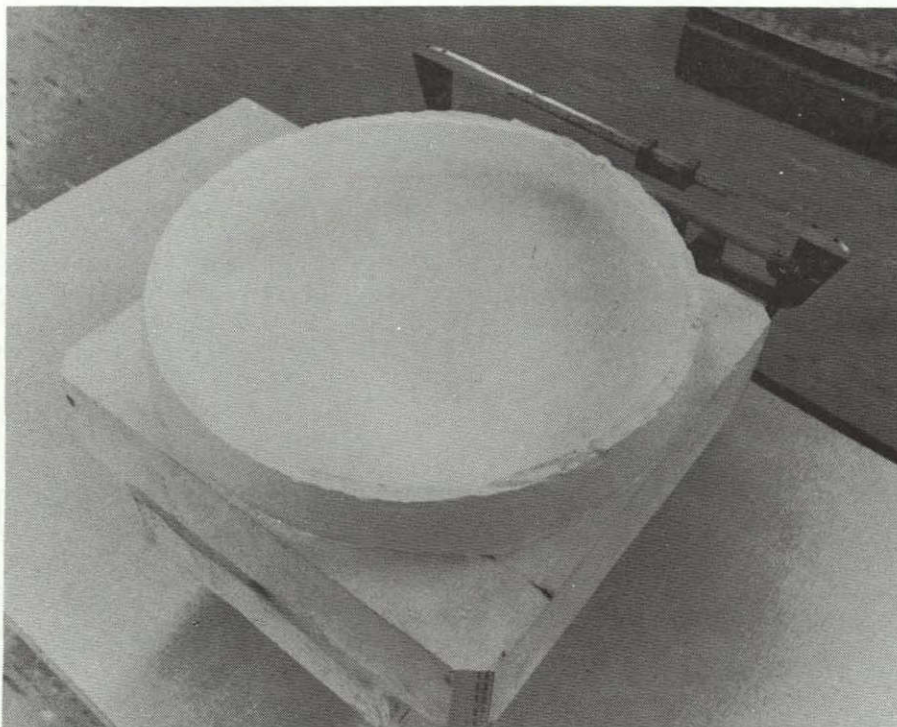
1/2 SCALE HEAT SHIELD NO. 3 AS REMOVED FROM CASTING MOLD
